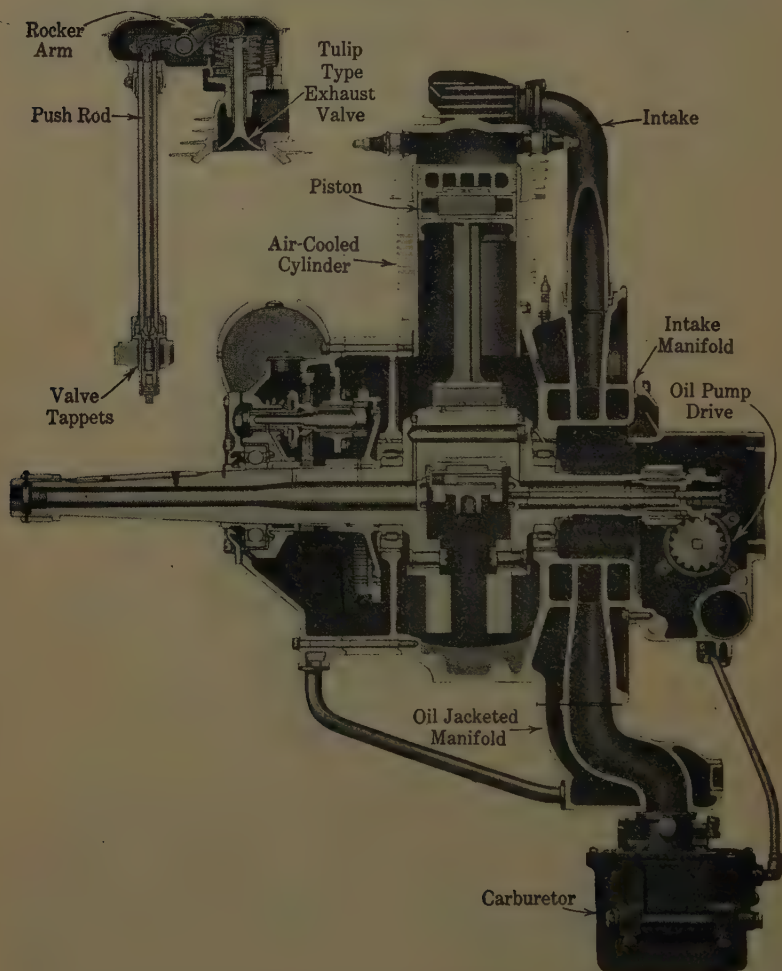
REAR VIEW "WHIRLWIND" AVIATION ENGINE
